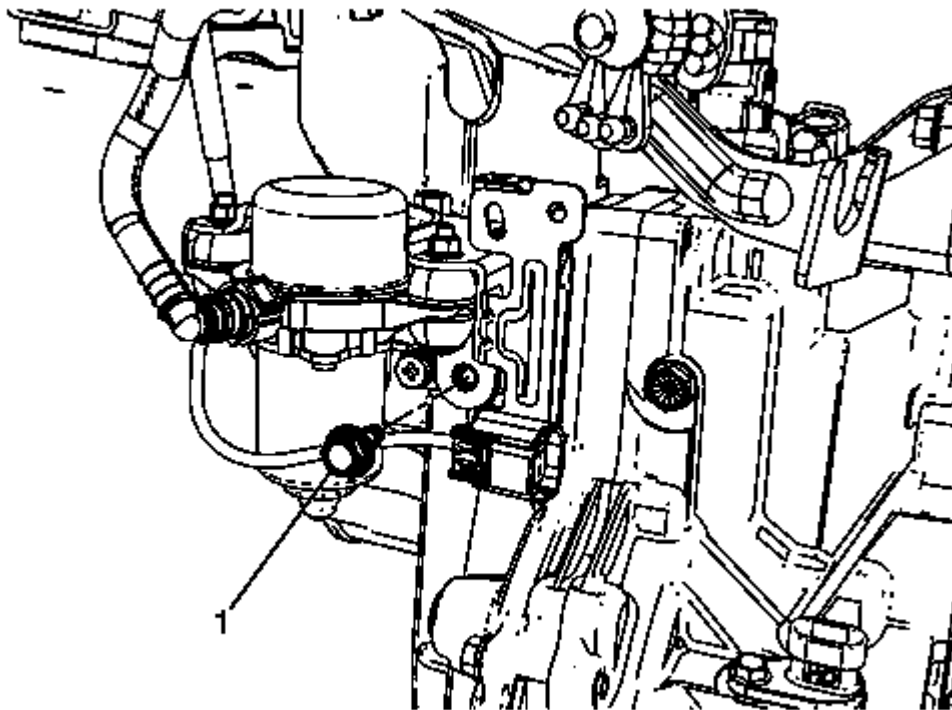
Power Brake Booster Pump Bracket And Transmission Case Bolt
